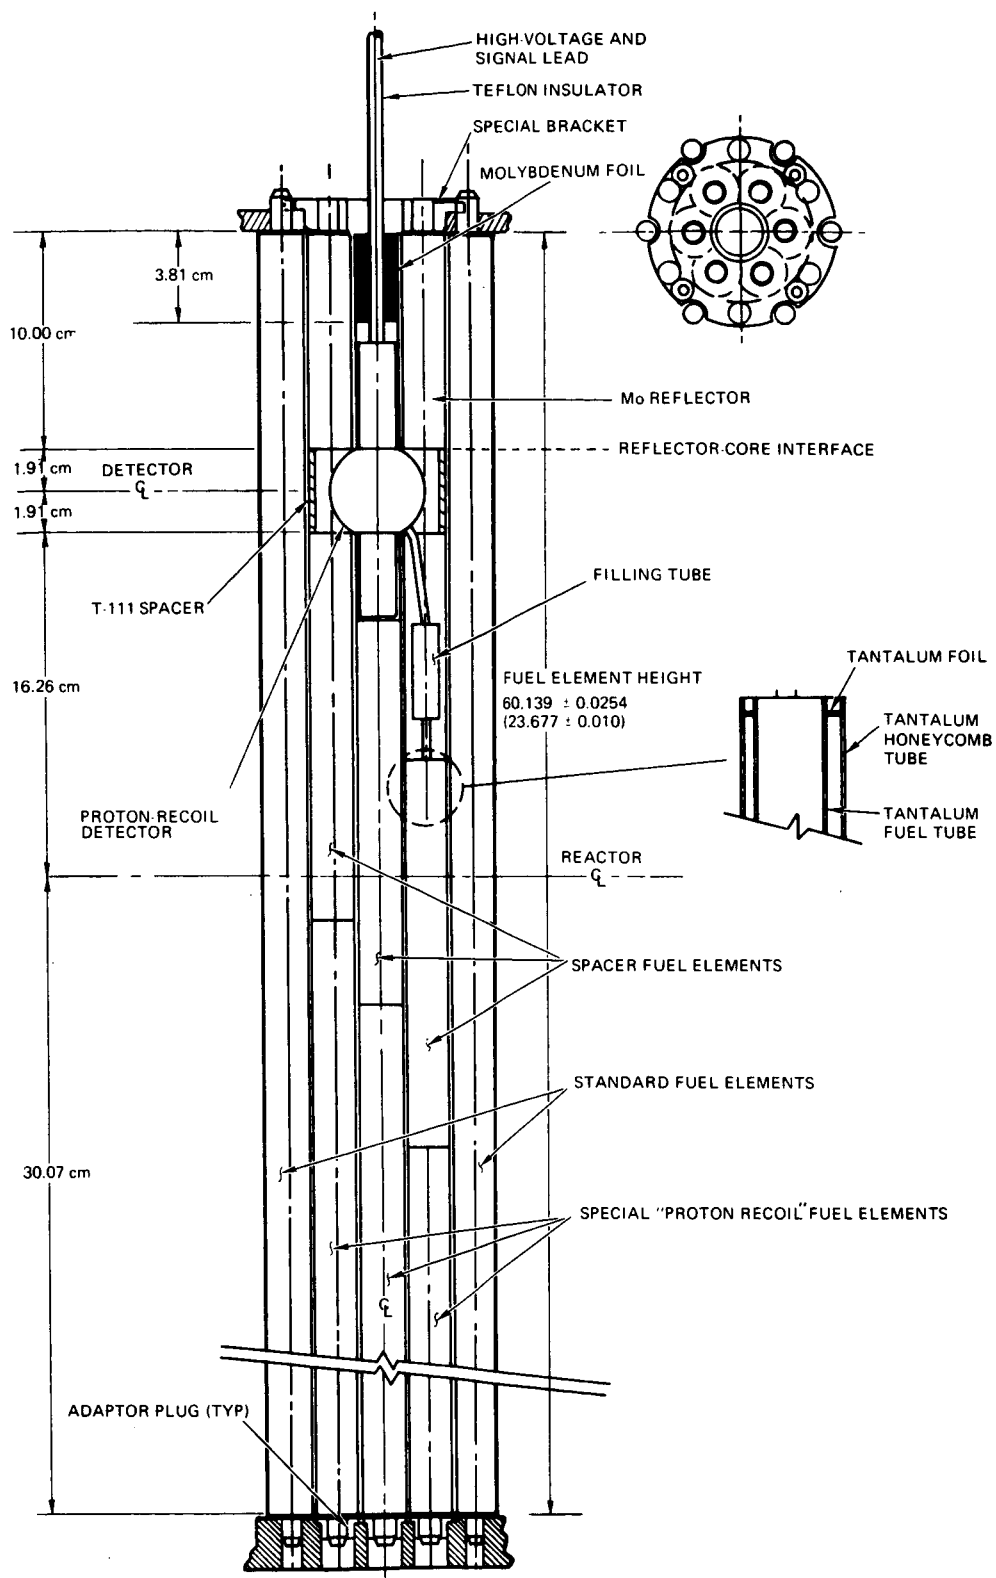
Proton-Recoil Detector Arrangement - Component Parts
